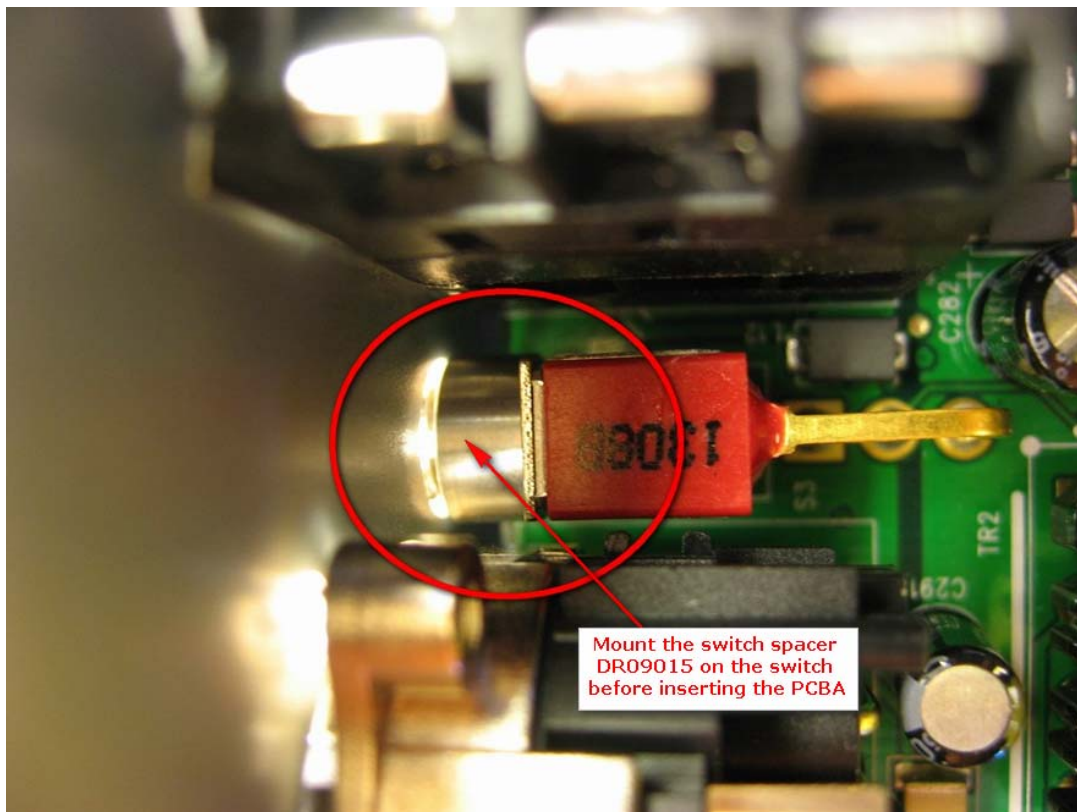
Remember to mount the aluminum switch spacer before the main board is inserted in the inner box.
